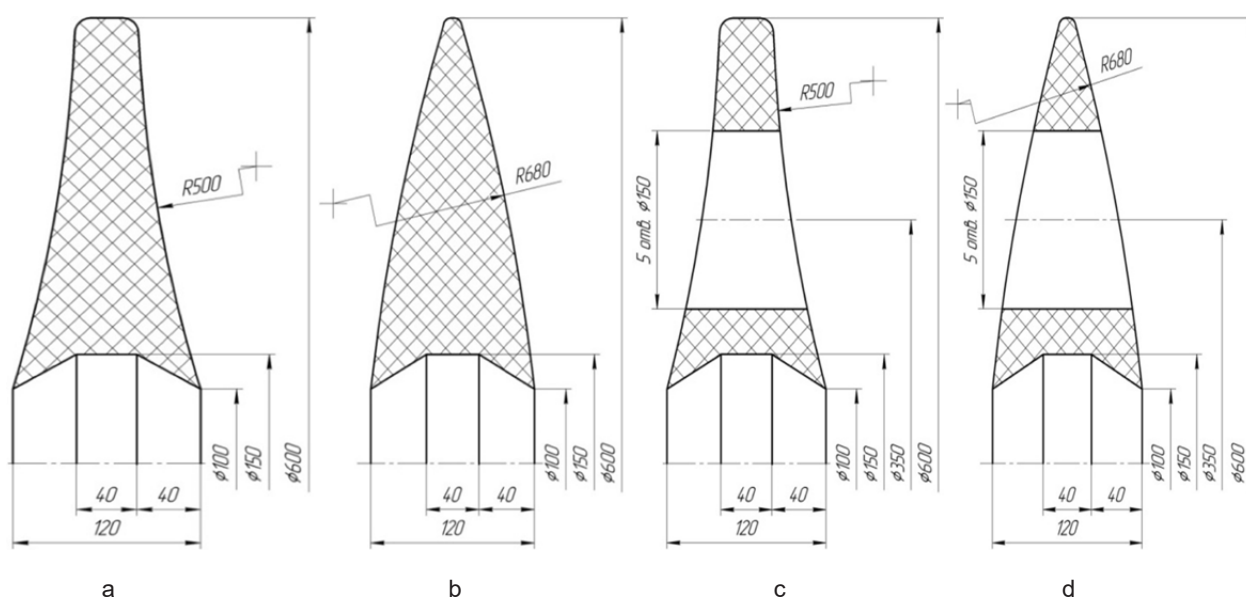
Flywheel designs for research: a - with concave side surfaces; b - with convex side surfaces; c - with concave side surfaces and radially located holes; d - with convex side surfaces and radially located holes
